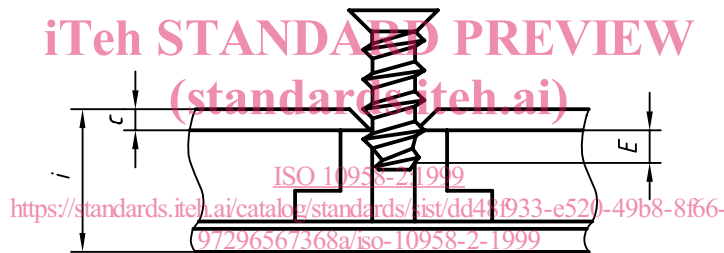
Illustration of screw thread engagement, insert well depth and countersink depth
